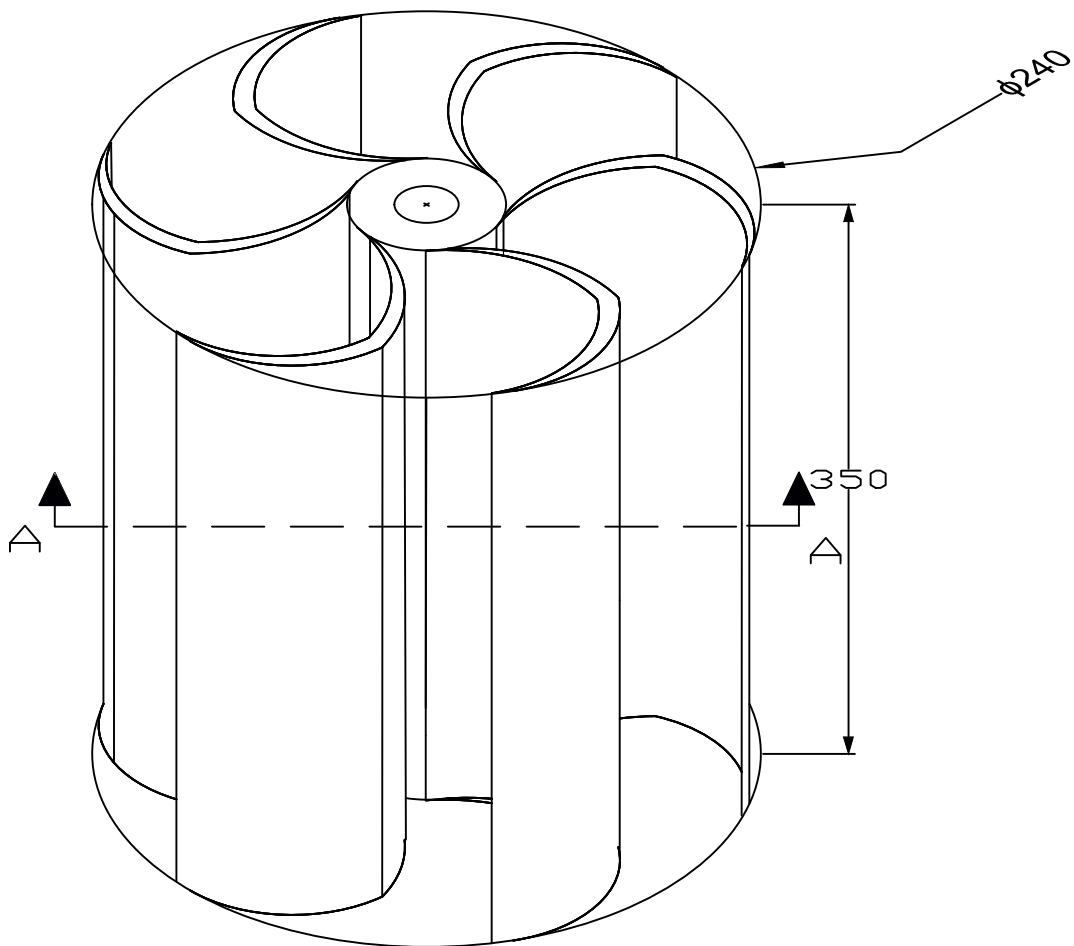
(b): Three Dimensional View of Six Bladed Vertical Axis Vane Type Rotor
